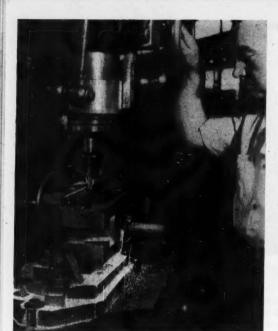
Milling Cocking Lever Slot in Breech Ring for 90 MM Gun
